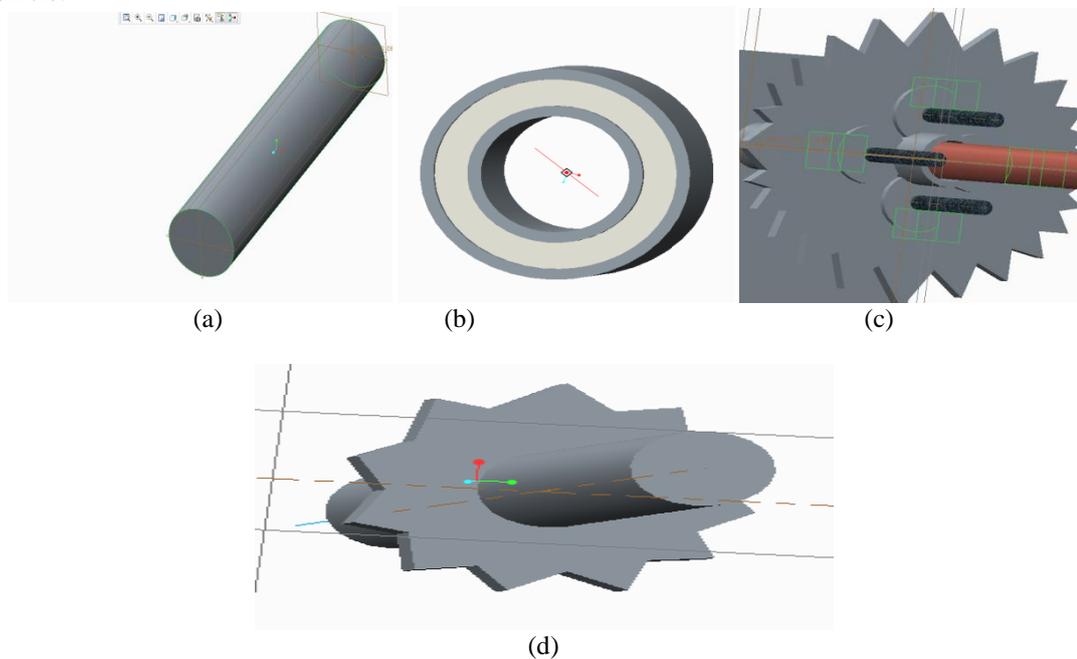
Parts Designed using CREO Software (a) Solid shaft (b) Ball bearing (c) Larger gear (d) Smaller gear
